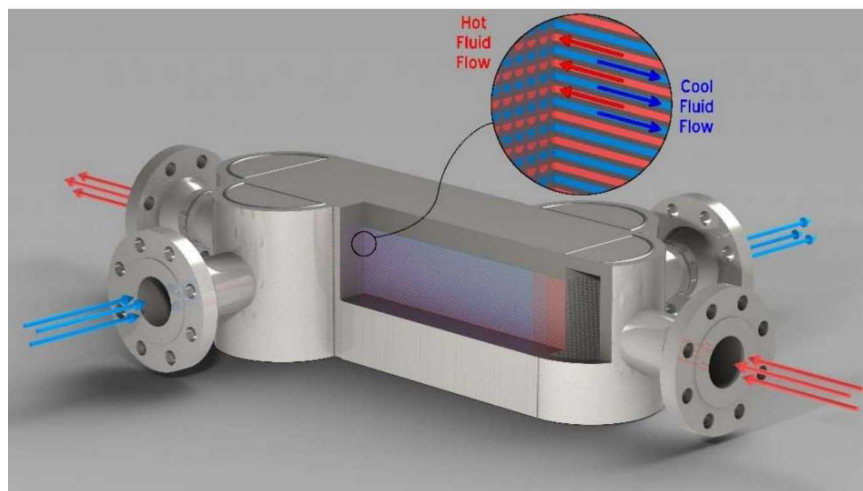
Schematic of microchannel heat exchanger with external headers. Cut-away view shows internal core structure with alternating hot and cool layers. Courtesy of Vacuum Process Engineering, Inc. (VPE).
